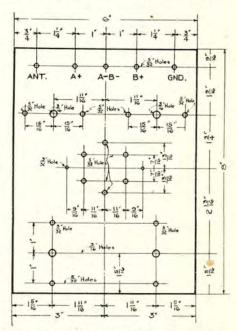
SUB-PANEL LAYOUT IN DETAIL
